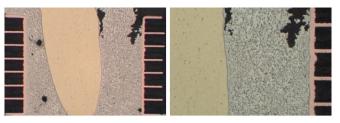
SAC305 Solder, ImAg Surface Finish with Au/Ni Pin Finish, 0.07% Ni Contamination, Did Not Fail
